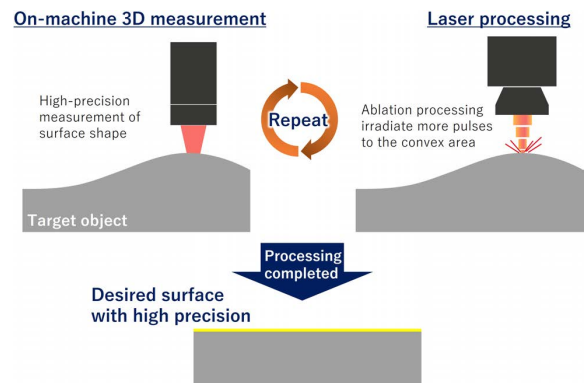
On-machine feedback processing by on-machine 3D measurement.
